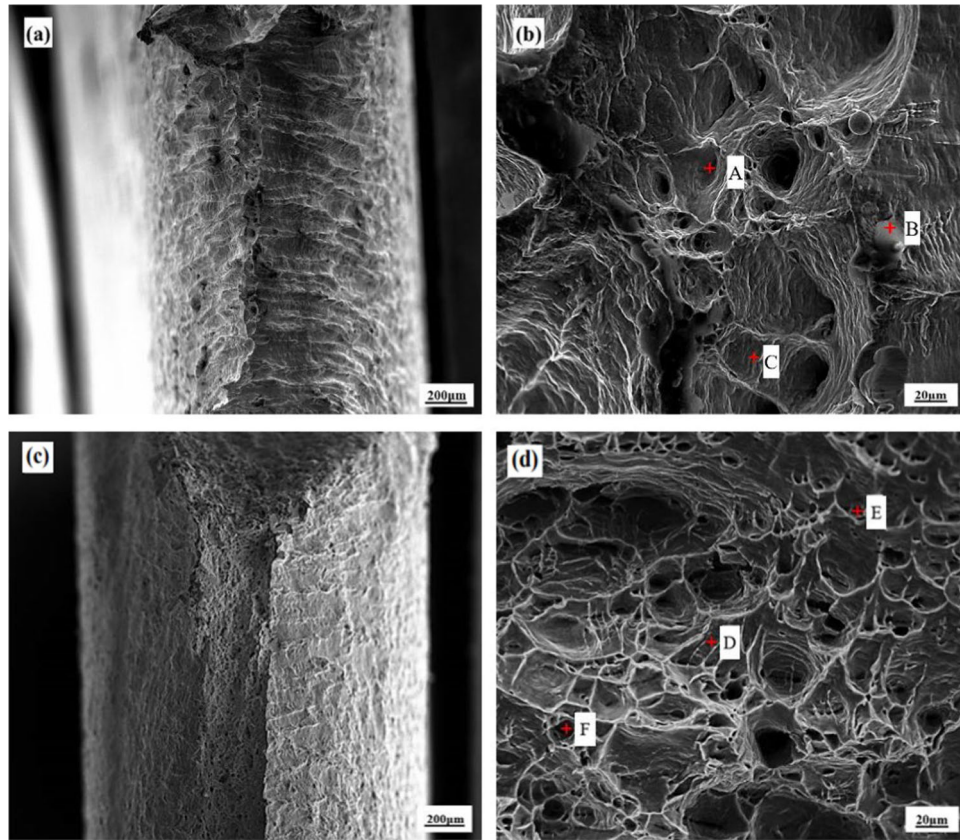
Morphology of the fracture surface of the tensile specimens: (a) Nb/TC4; (c) Nb/SLMed TC4
